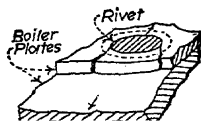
Showing a piece being sheared from boiler plate by rivet.
